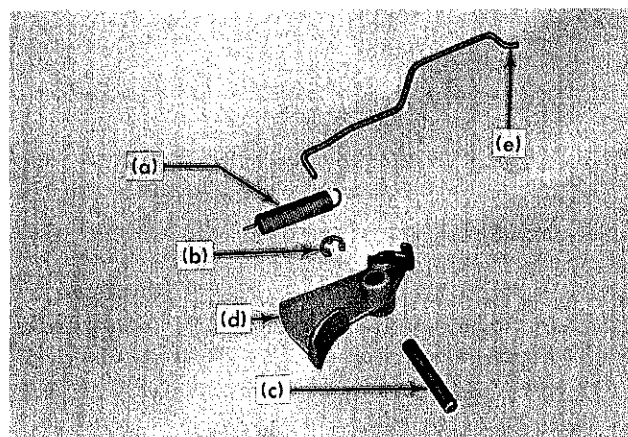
The trigger assembly consists of the trigger spring (a) trigger pin retainer (b) trigger pin (c) trigger (d) and throttle actuator rod (e).
